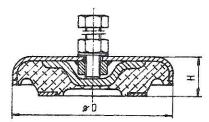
Cushion pad PM 120, PM 145, PM 175 for application with tool machines and other industrial equipment.
